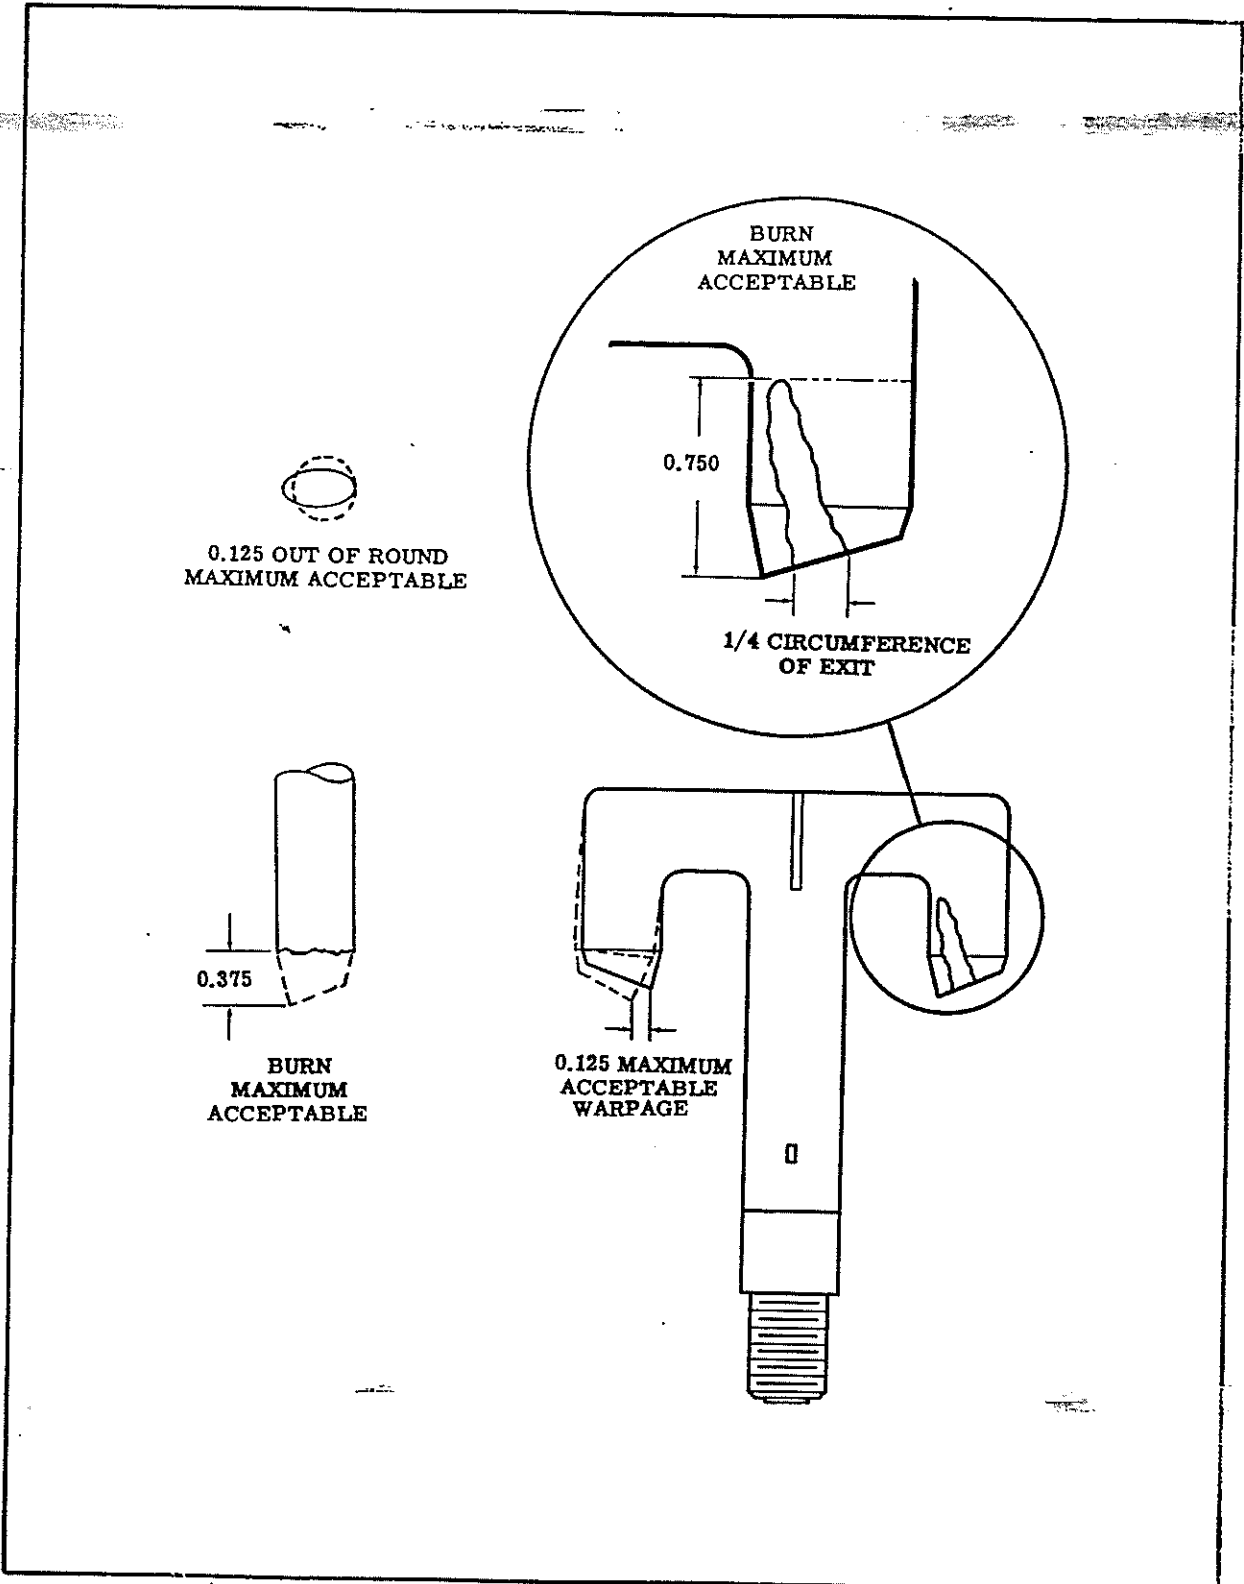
Fuel Vaporizer Tube Burn Limits
